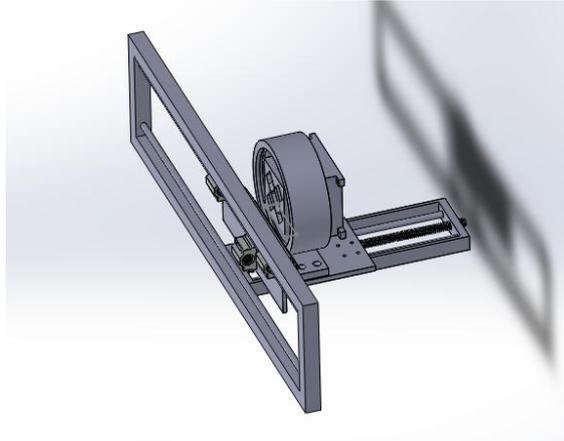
Top view of the areca nut holder in its frame with the cutting blade frame.
